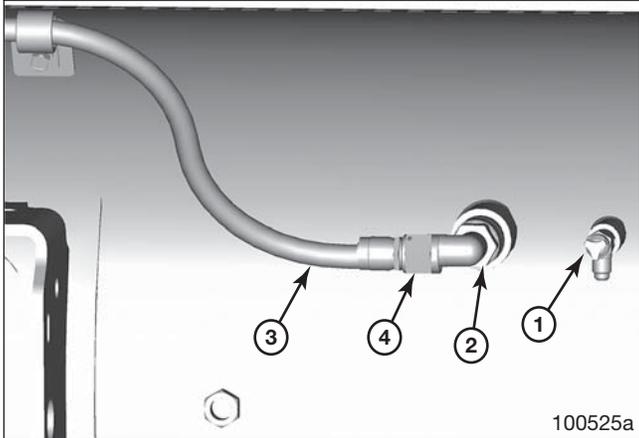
Mechanical Fill Valve/OPD – F-650 Single Tank/F-59 Saddle Tank
